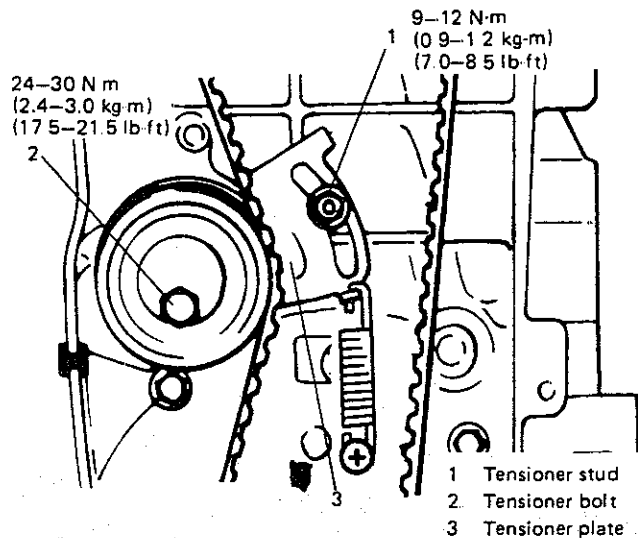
Timing tensioner torque specifications. 1.3L SOHC engine
